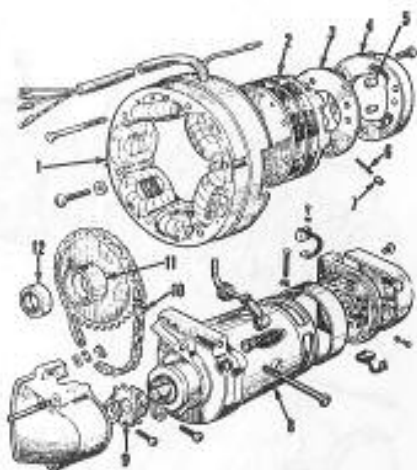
Exploded view of AC generator (alternator) and starter drive parts.
